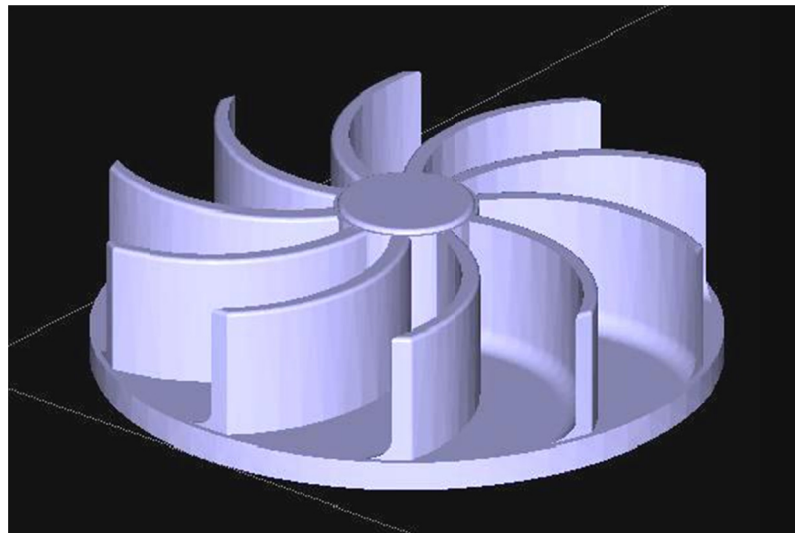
Moderately complex geometry of cast product – A pump impeller.
